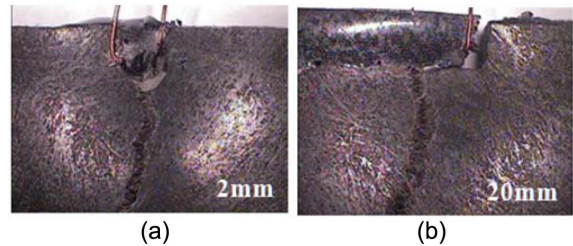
Specimen fractures of CF/PP composites with different notch size: (a) 5 mm crack; and (b) 20 mm notch
